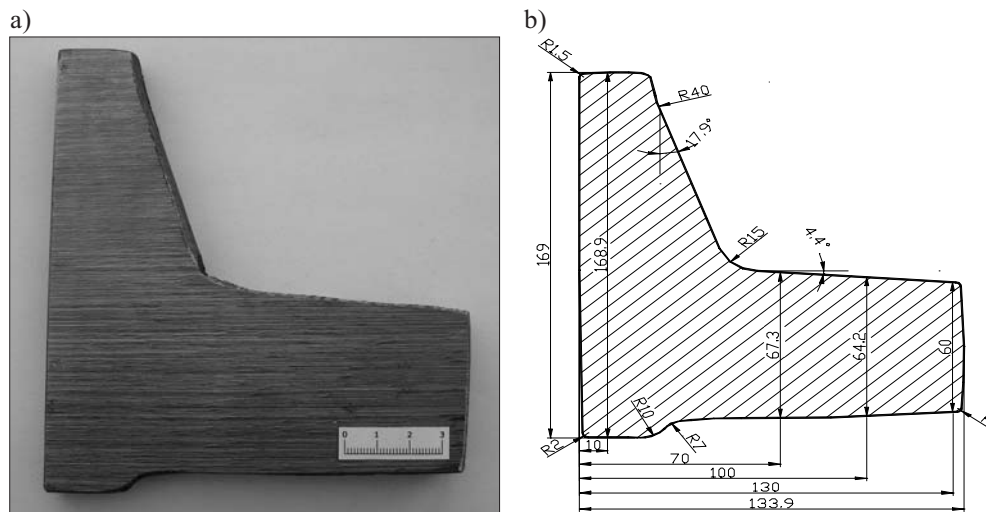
Sample of the cross section of 24'' welding neck type ring: a) sample of the cross section; b) scheme of the cross section
